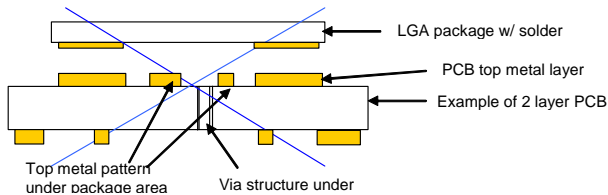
Incorrect PCB Top Metal Pattern Under Package
